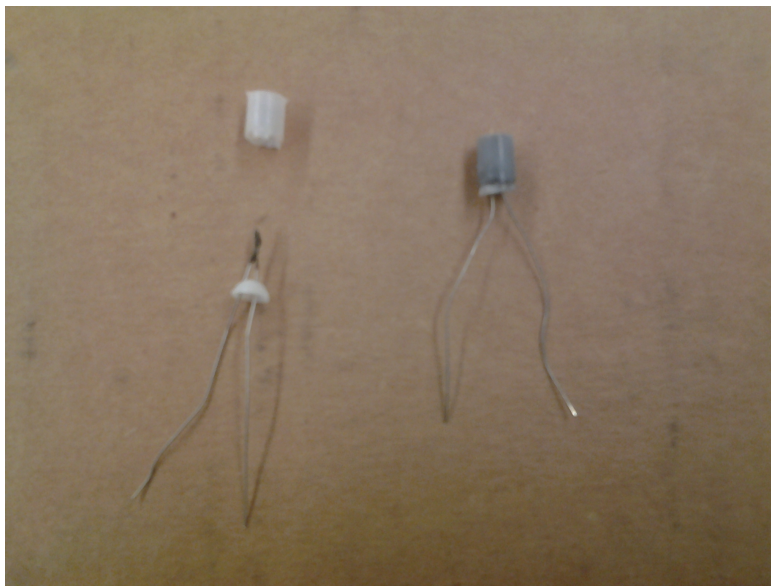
The assembly of the 6 mm diameter cylindrical igniter casing.
